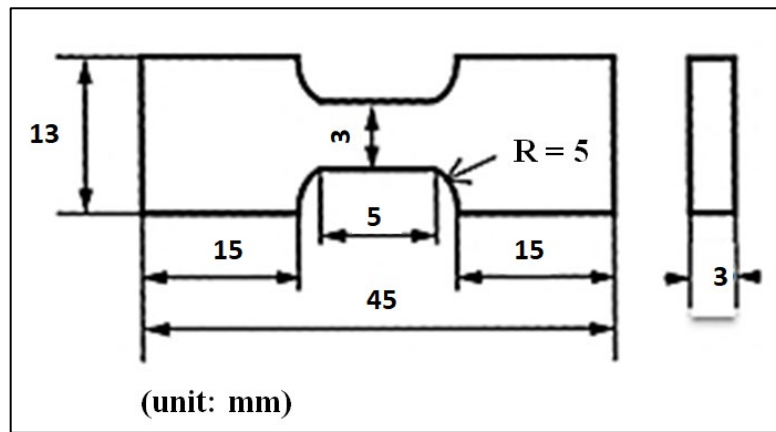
The dimensions of the tensile test samples are expressed in (mm)
